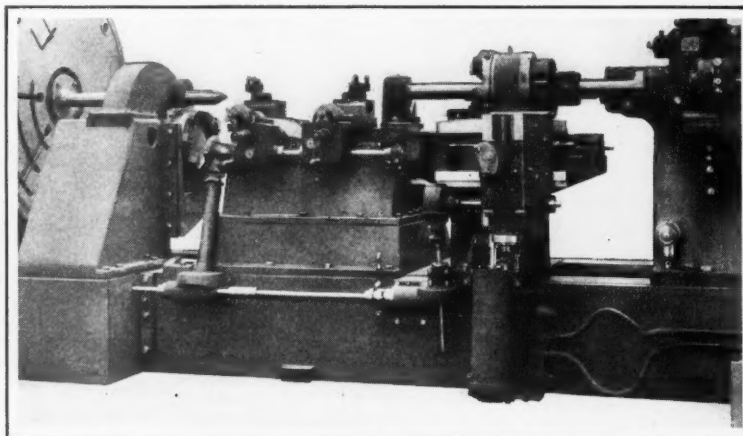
Locomotive Axle-journal Turning Lathe Equipped for Double-quartering and Crankpin Turning
